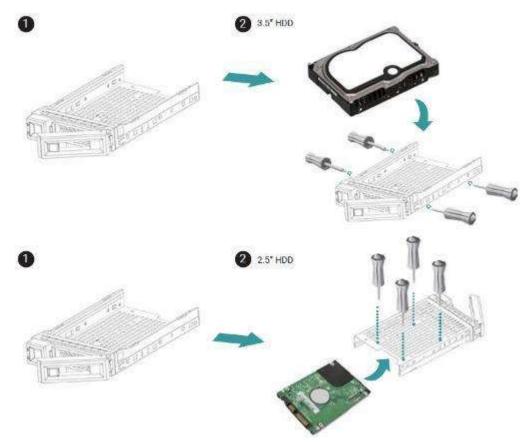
Align a Disk Drive & Install into a Tray (LFF-to-LFF)
